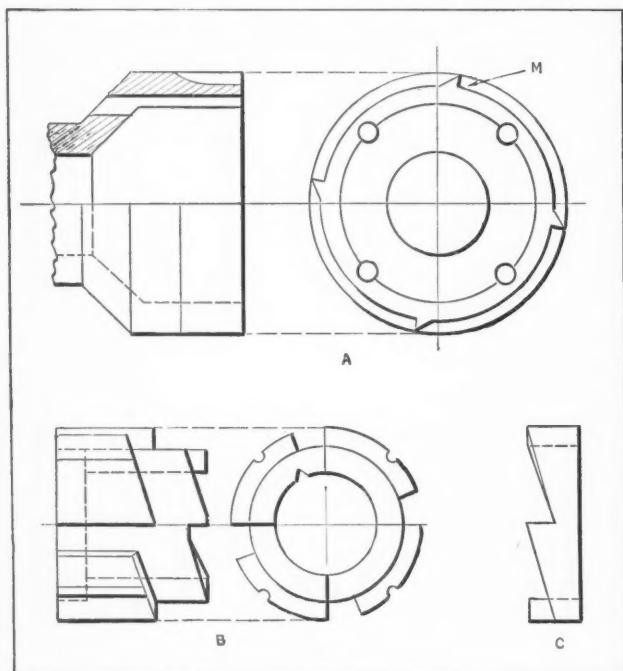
Detail Views of Parts A, B, and C, Fig. 1
